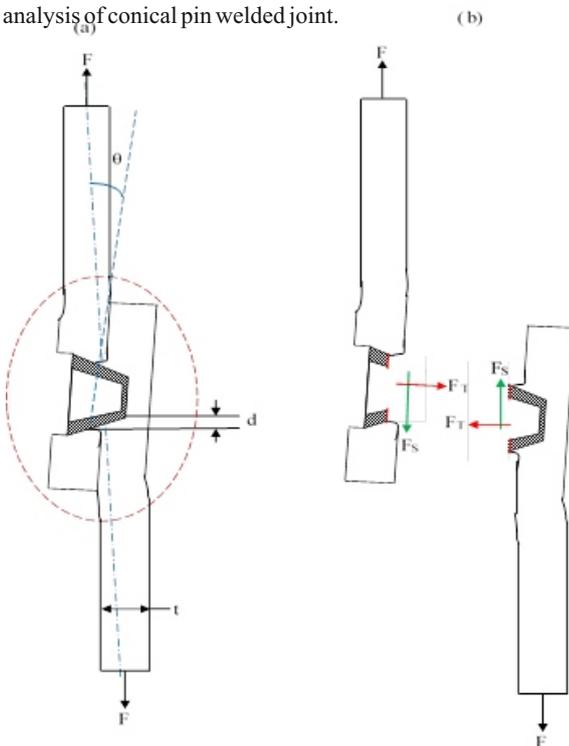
Axial loaded conical pin weld (a) feeble nugget rotation of weld; (b) fractured specimen with stress pattern
